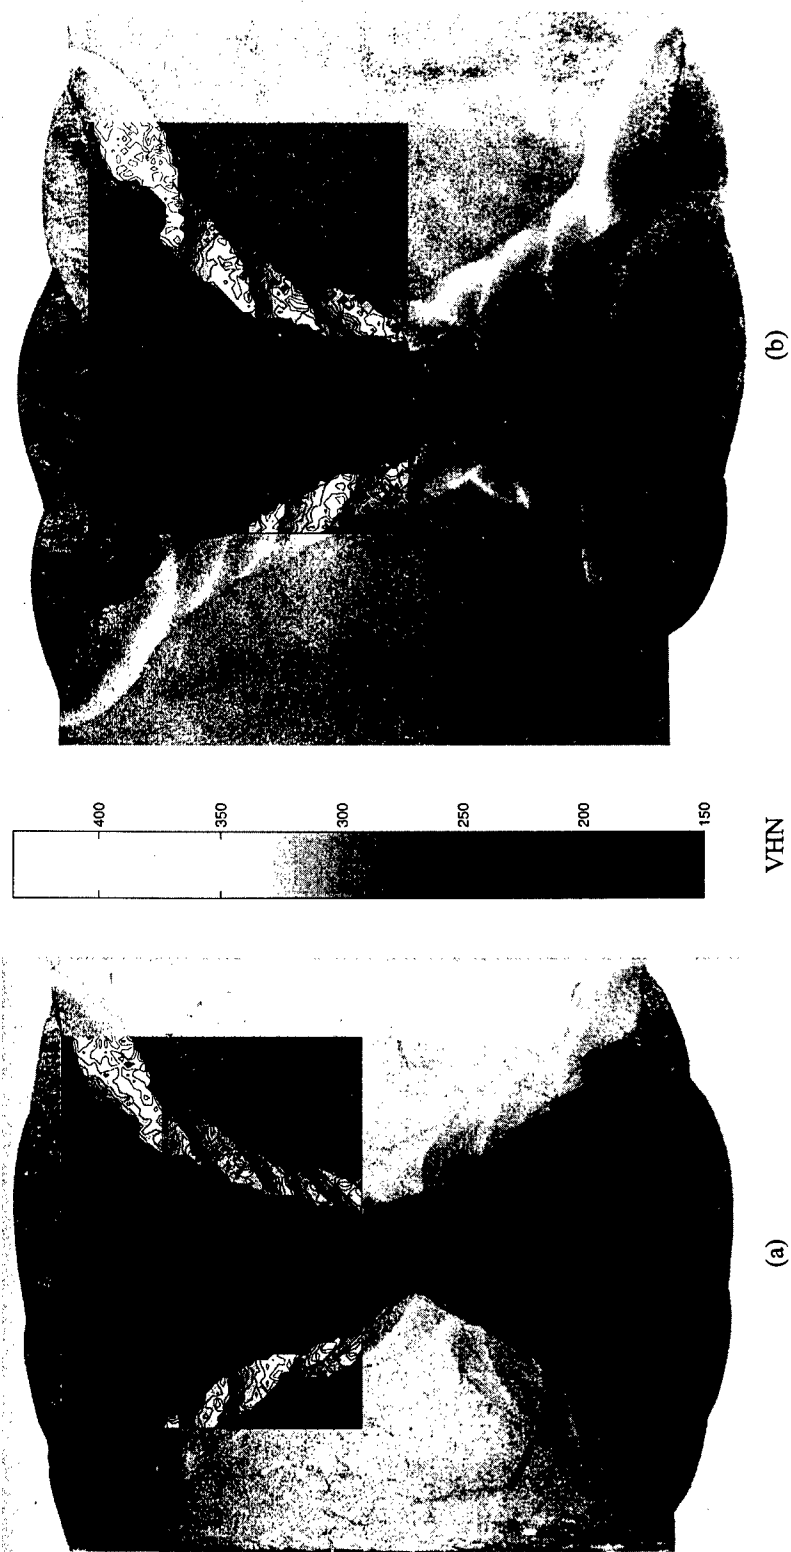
Macro-photographs of cross sections from weld (a) HBA and (b) HBB.
